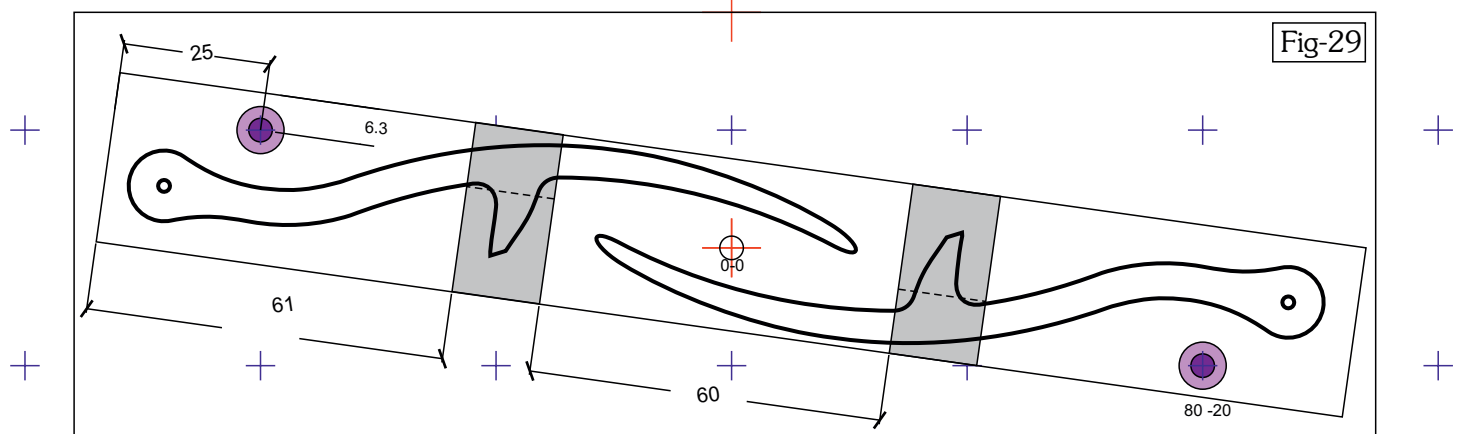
shows this new arrangement and will be cut from 10mm thick stock so that cutting to 8.5mm deep will retain 1.5mm throughout the base, obviating the need for tabs. It does mean that I'll have to saw the components out and machine the 1.5mm off in a second operation in the Mill (not CNC) but I have to do that for the area which has to be 6mm thick anyway.
